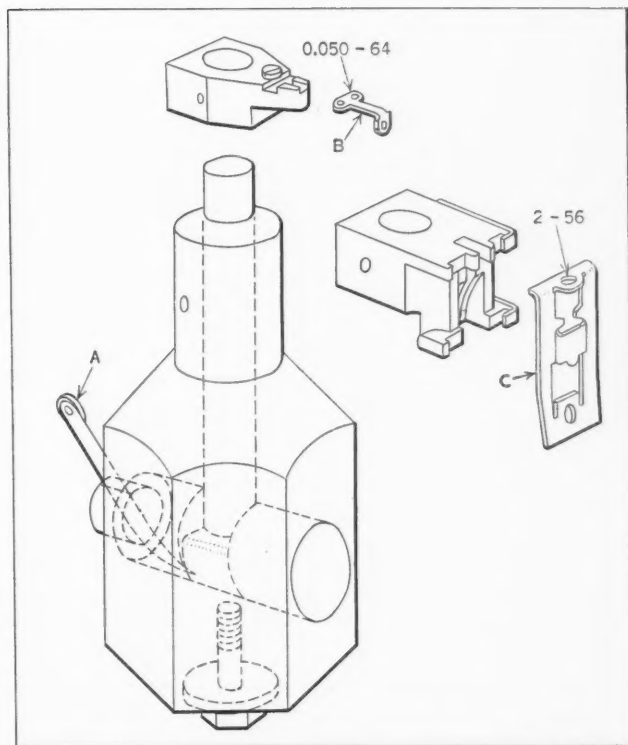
Sensitive Type of Tapping Fixture for Small Holes
